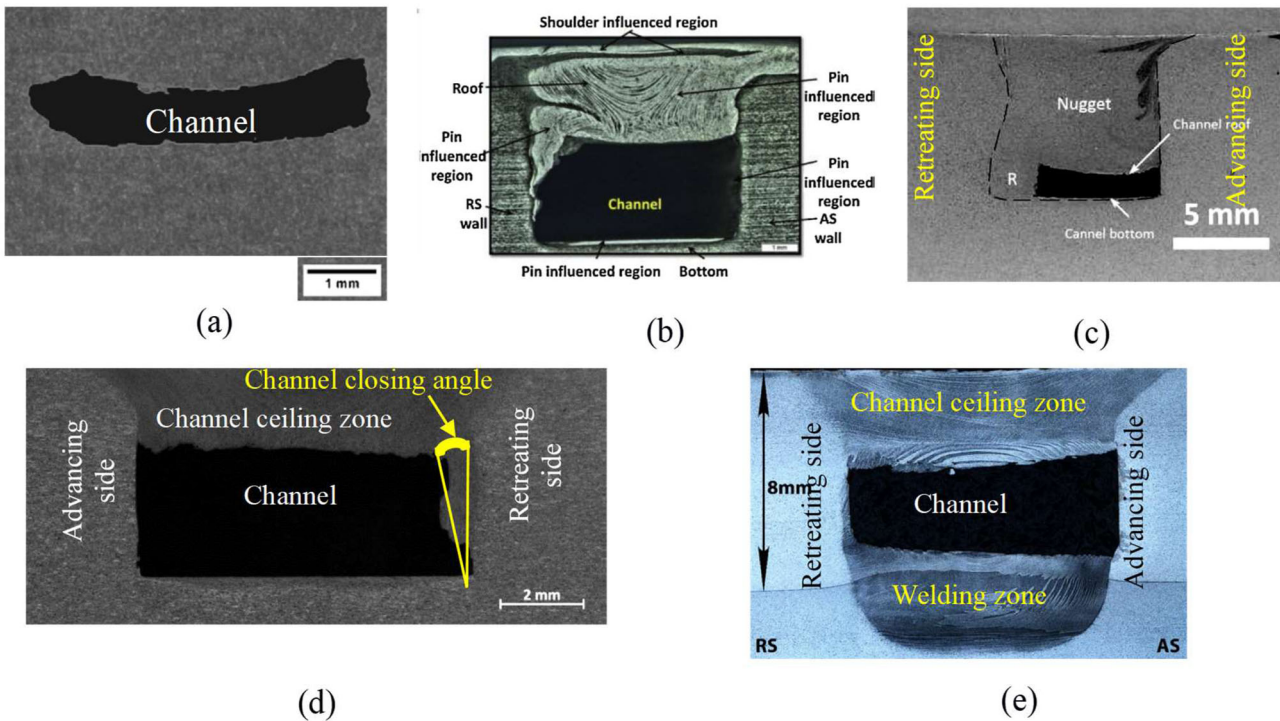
Cross-section of channel under different variants of friction stir-based channeling (a)^[67] and (b)^[70] FSC with shoulder-workpiece clearance, (c) FSC with tilt angle and toe flash,^[73] (d) FSC without shoulder-workpiece clearance^[52] and (e) HFSC.^[51]
